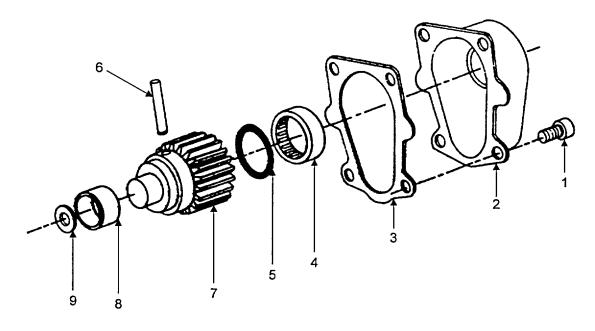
HAND CRANK ASSEMBLY GEARS
